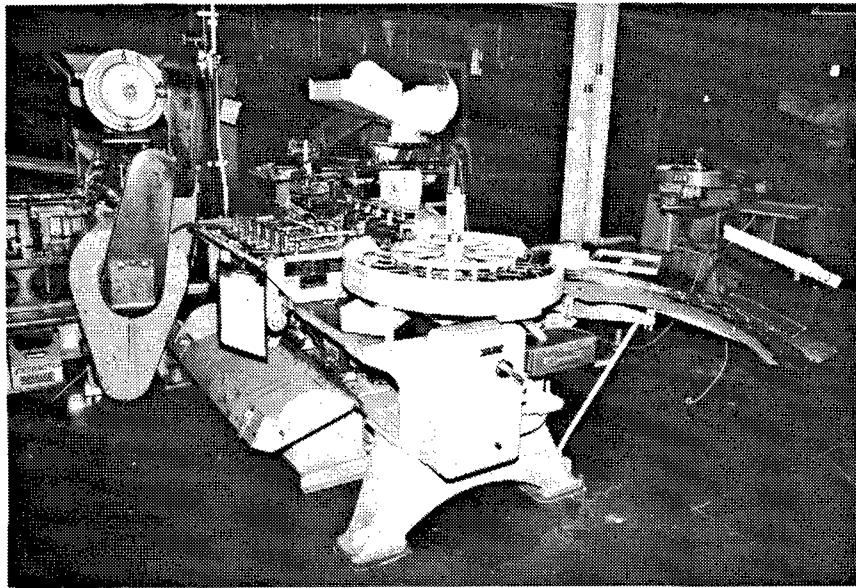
Building 102: Gage and Weigh Machine manufactured in 1942 by Star Tool and Die.
